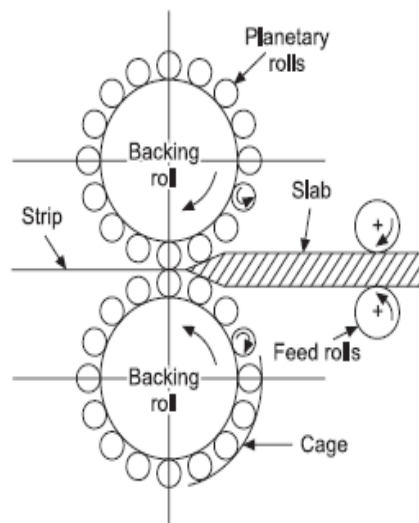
Planetary rolling mill. Note that the small diameter rolls contained in a cage (shown partly) are used for rolling purpose. The chief feature of the planetary mill is that it reduces a hot slab directly to strip in one pass through the mill.
